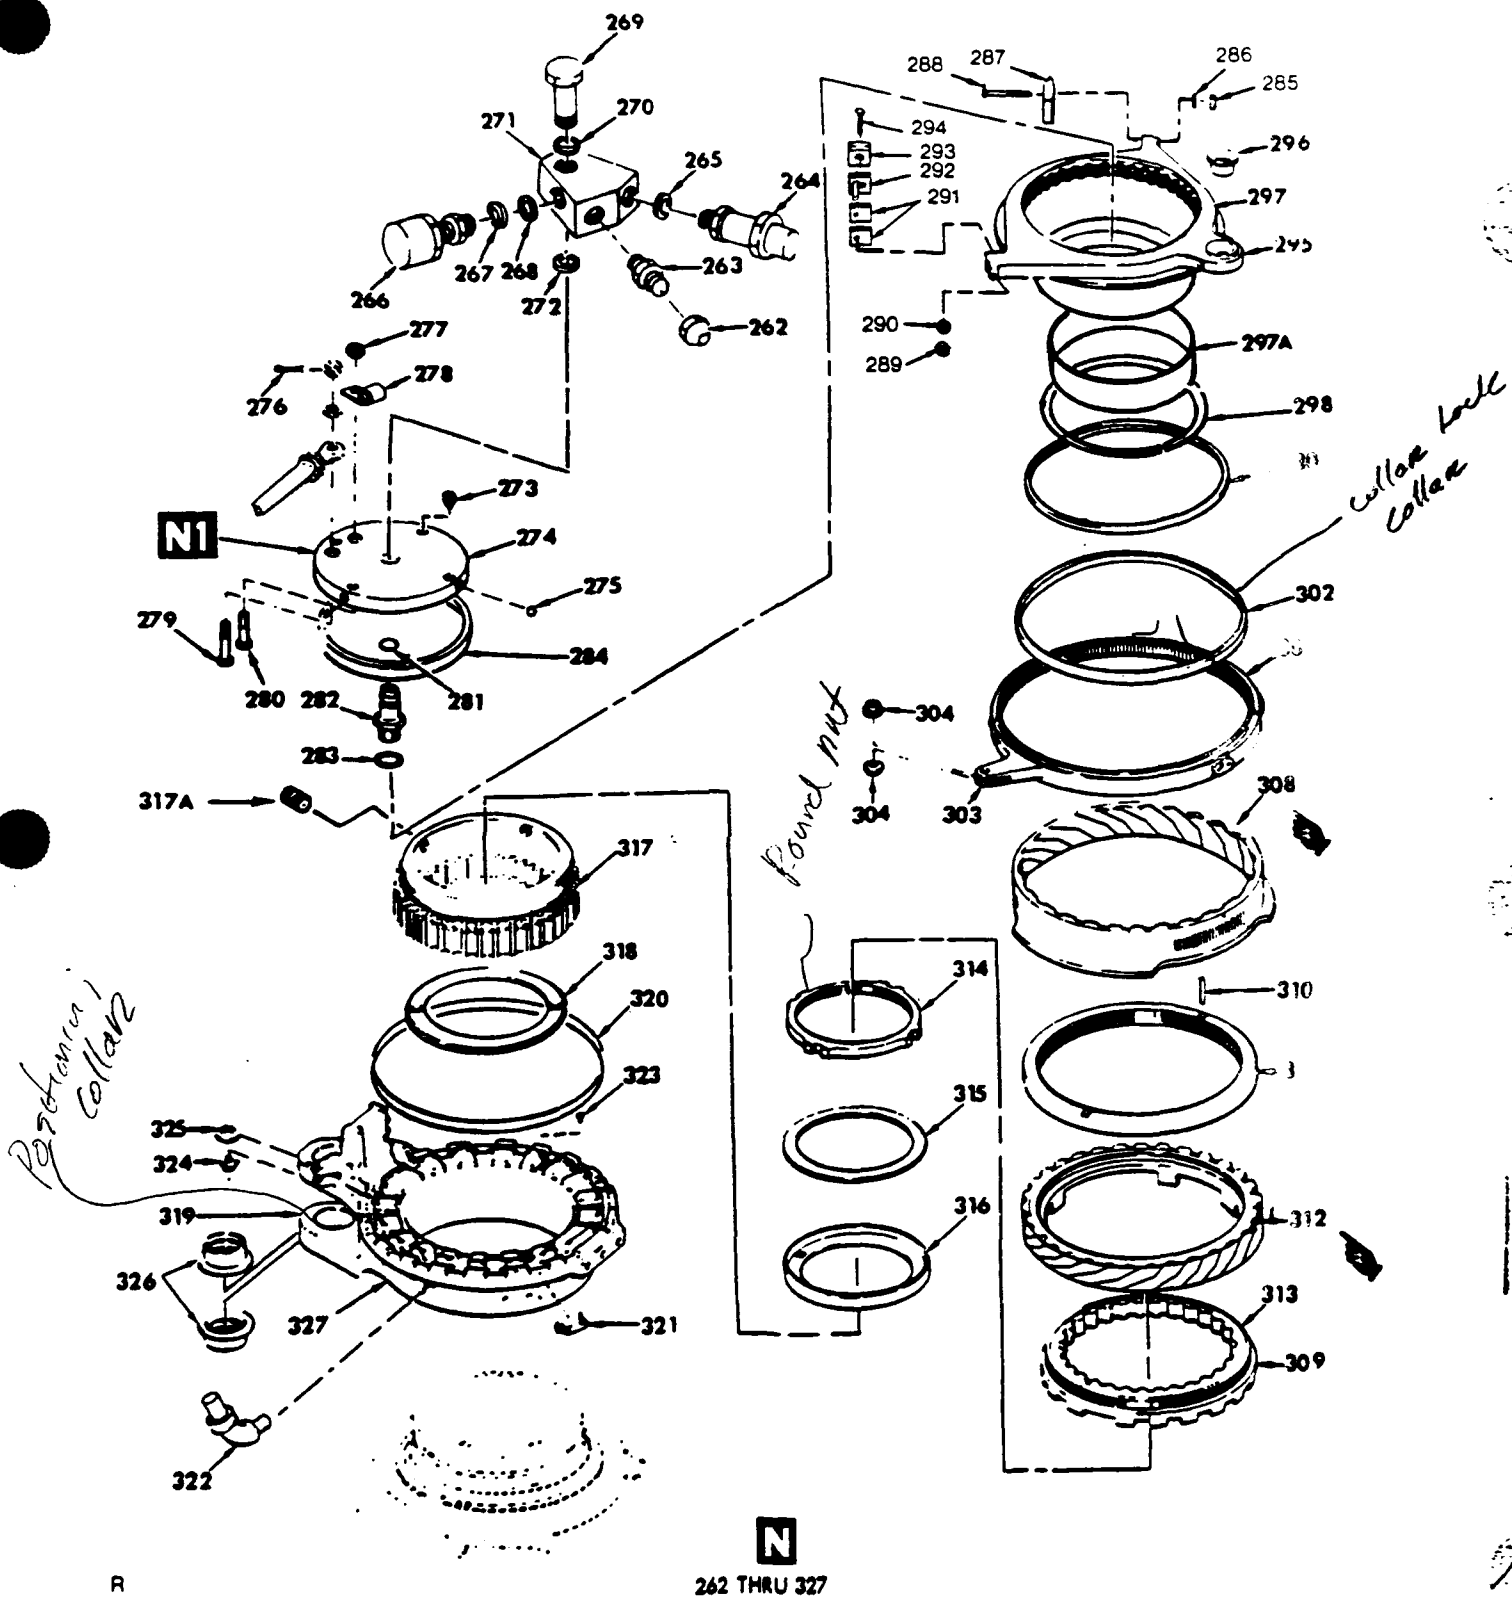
RH Aft Strut Assembly (Sheet 12 of 18)
